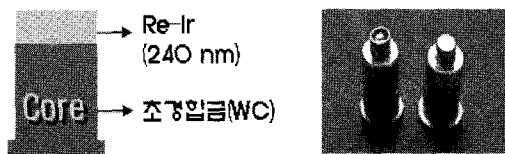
(b) Re-Ir coating structure and Re-Ir coated molding core
